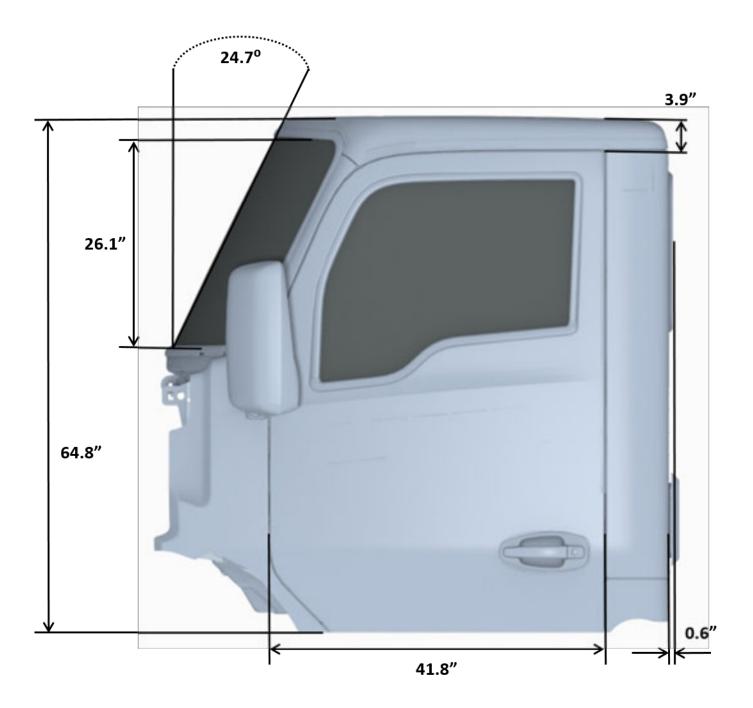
Cab Dimensions 2.1m Medium Duty
